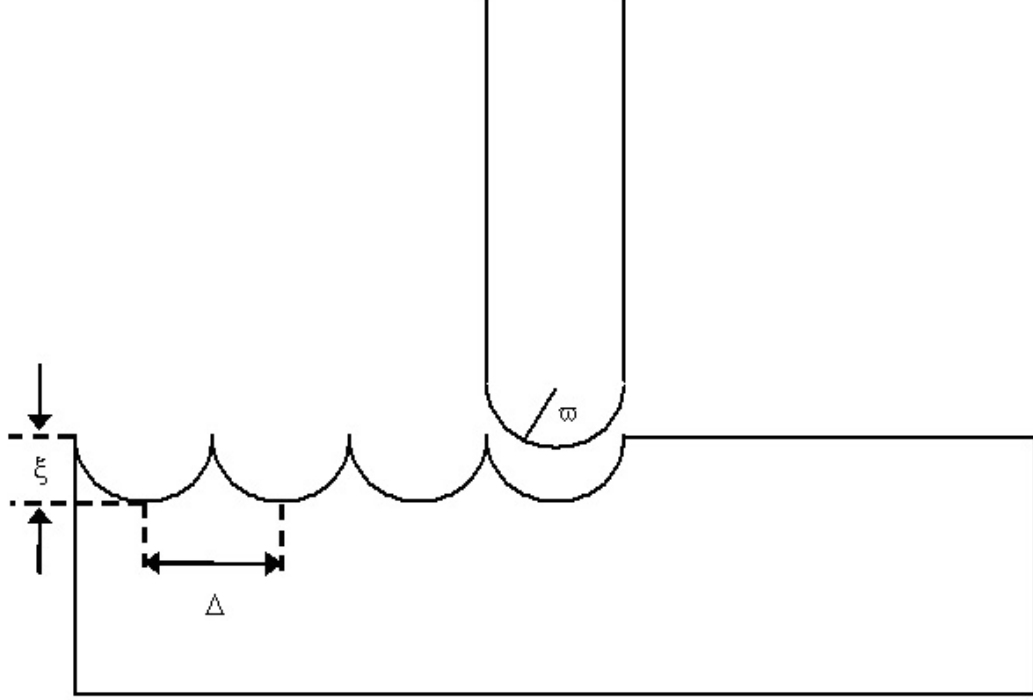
A schematic representation of scalloping caused by machining a surface with a ball-nose end mill.
